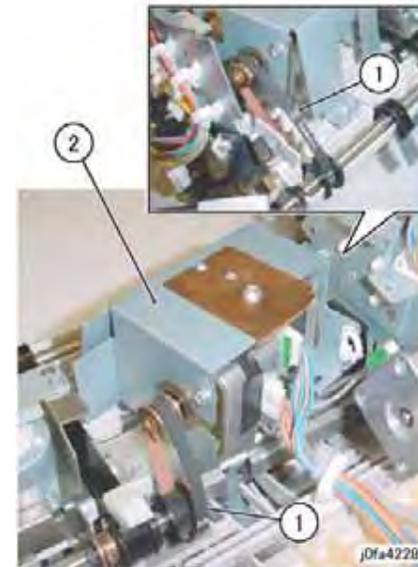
Removing the Eject/Set Clamp Motor Assembly
